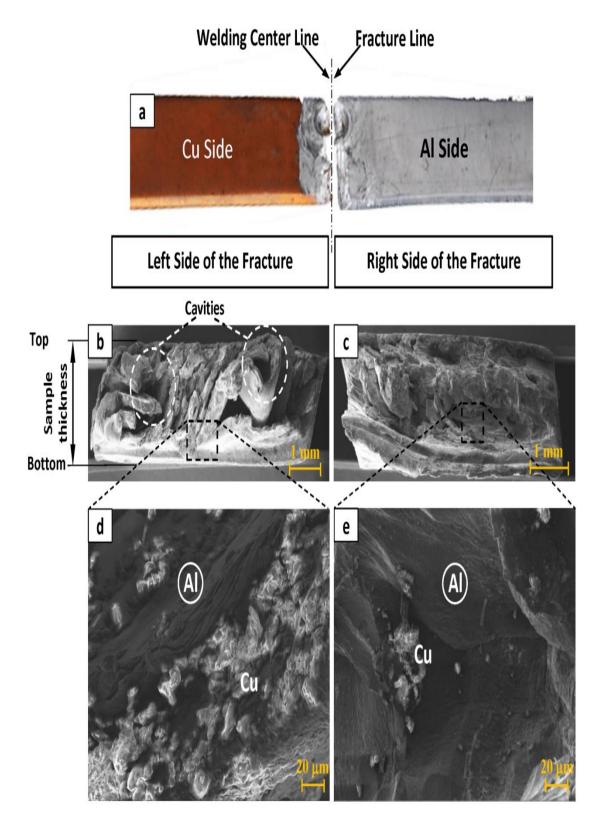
A photo and SEM images of the fracture of an Al-Cu (not annealed) Butt joint that is welded by FSW at 910 rpm and 16 mm/min. The joint has been fractured due to tensile testing.
